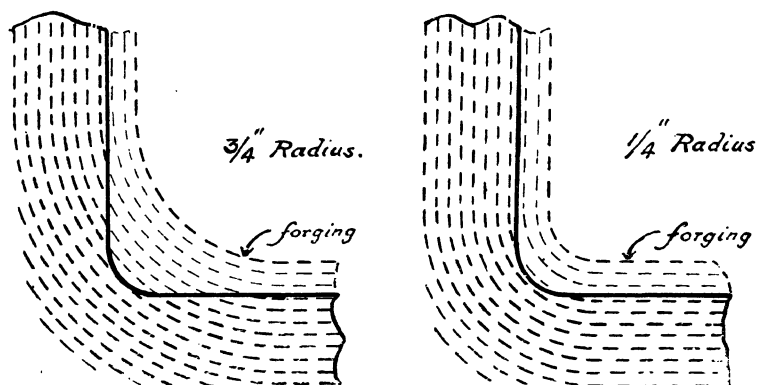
Diagram showing Importance of Radii in Stampings and Forgings.
